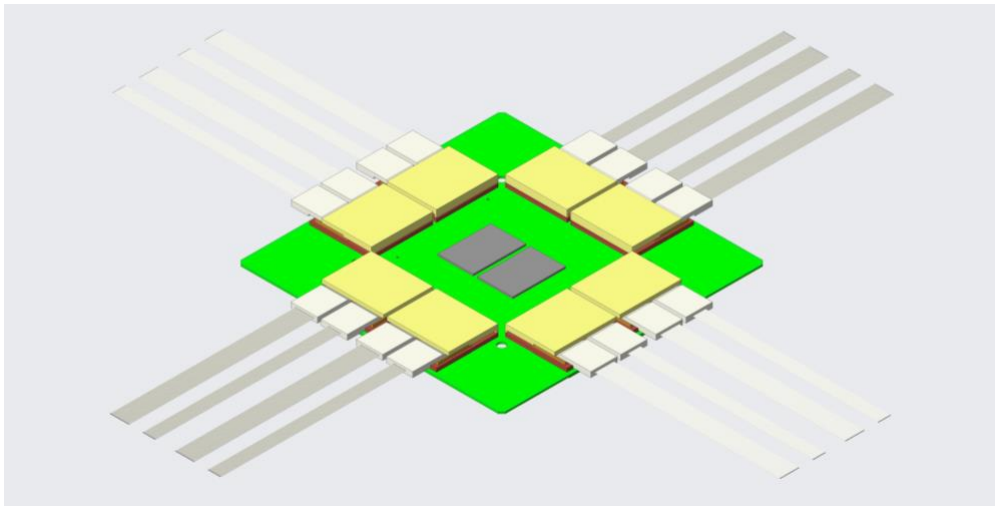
Example embodiment of a 51Tb/s CPO assembly
